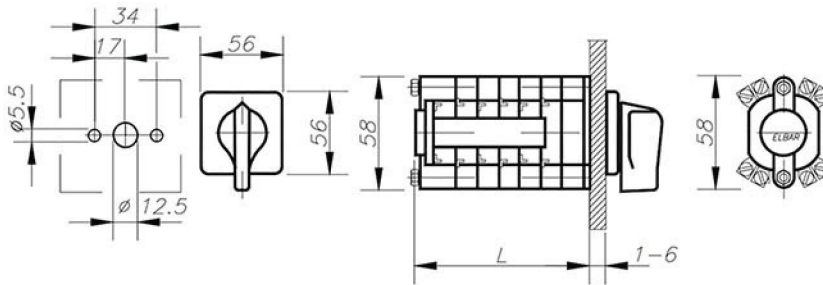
External dimensions of switches with a fixed key and mounting holes.
